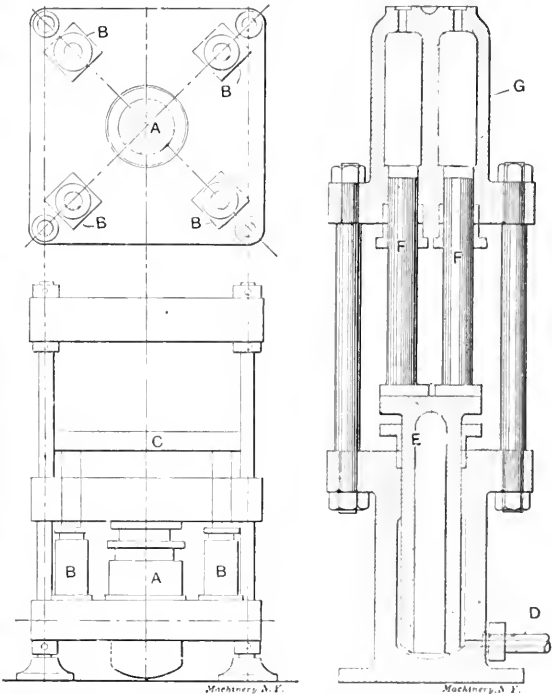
Sketch of Flanging Machine, showing Main and Auxiliary Cylinders. Fig. 2. Hydraulic Equalizer, for Operating the Auxiliary Cylinders in Unison.
